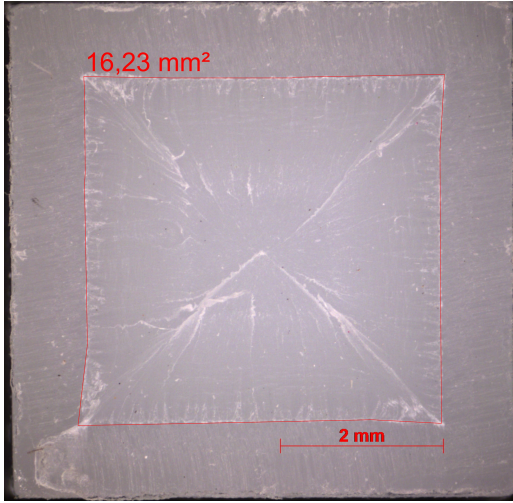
Measure fracture surface of an FNCT specimen applying an optical microscope.
